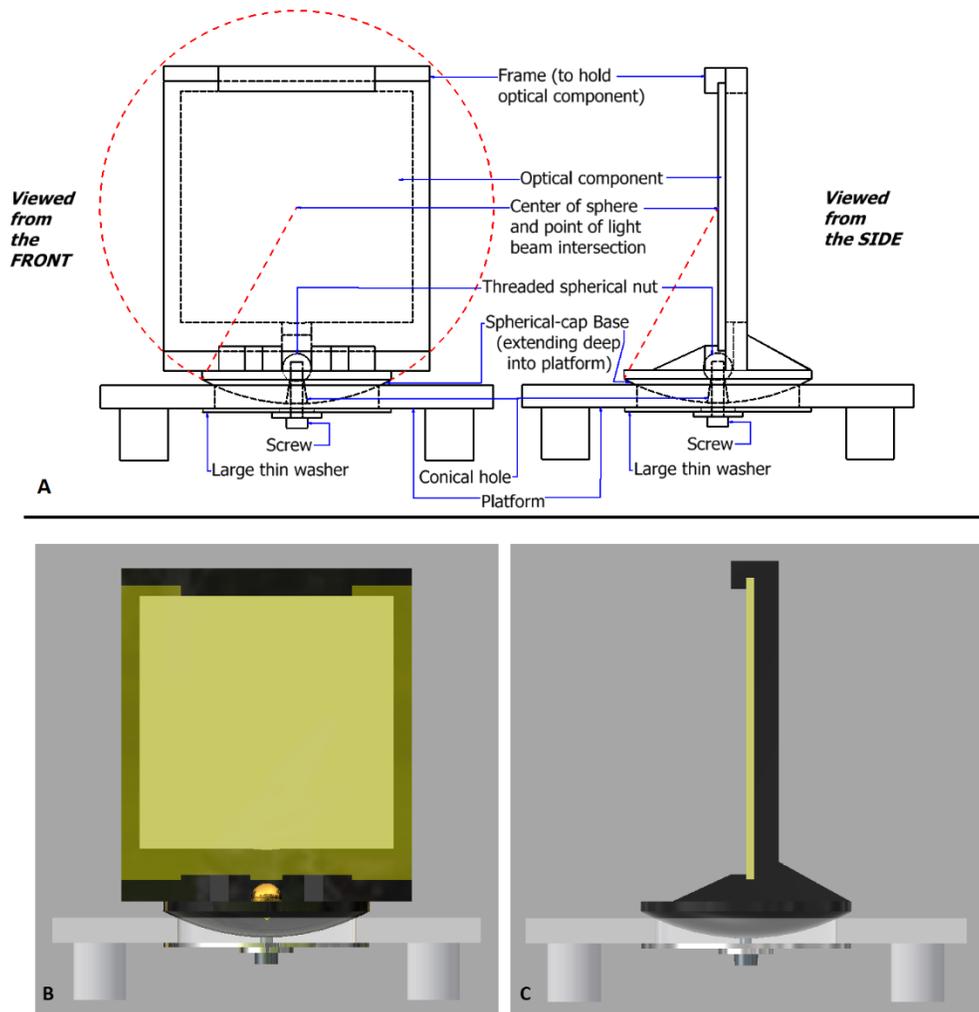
The mount. The upper part of the figure shows labeled drawings, while the lower parts show 3D-rendered representations.
